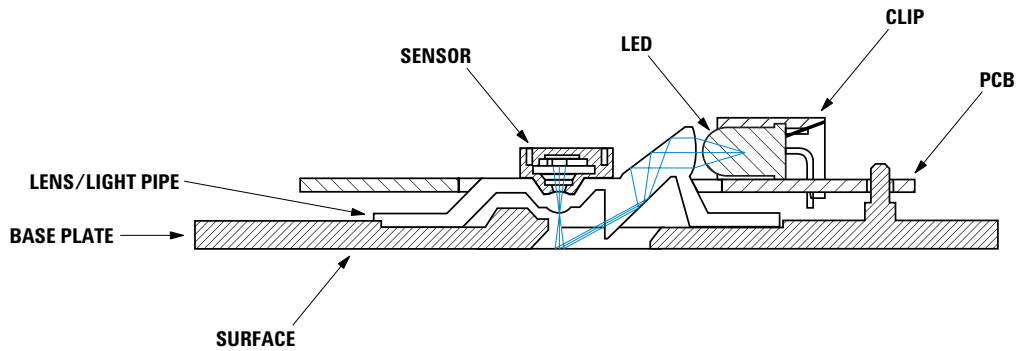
Sectional view of PCB assembly highlighting all optical mouse components (optical mouse sensor, clip, lens, LED, PCB, and base plate)
